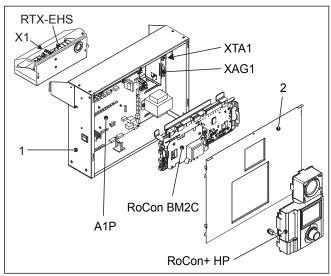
Position of the printed circuit boards and terminal strips (for the legend, see Chap. 10.6)
